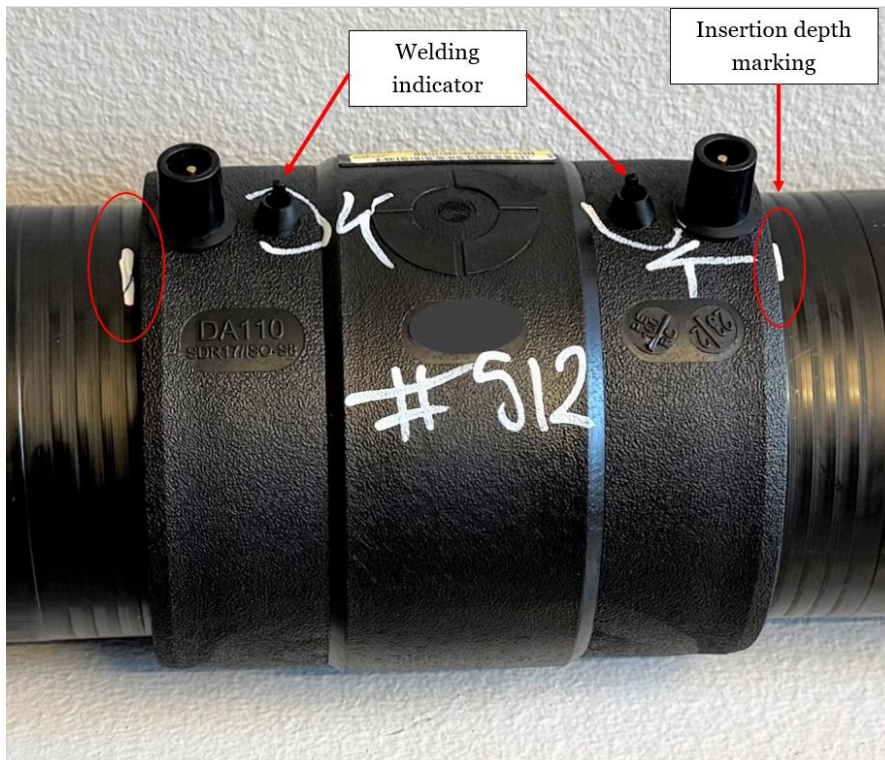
Example showing markings of insertion depth. The weld indicators that indicate that the material has melted in the weld joint is also shown in the picture.
